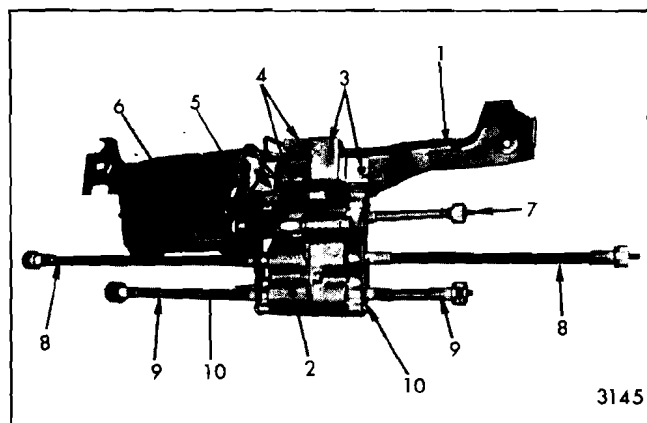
Six-Way Seat Adjuster Motor, Transmission, Cable and Support Assembly
